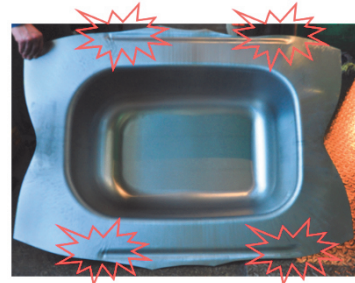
Photo of final shape of a bathtub W1000 for the original die design with marked wrinkling area near geometrical drawbead
